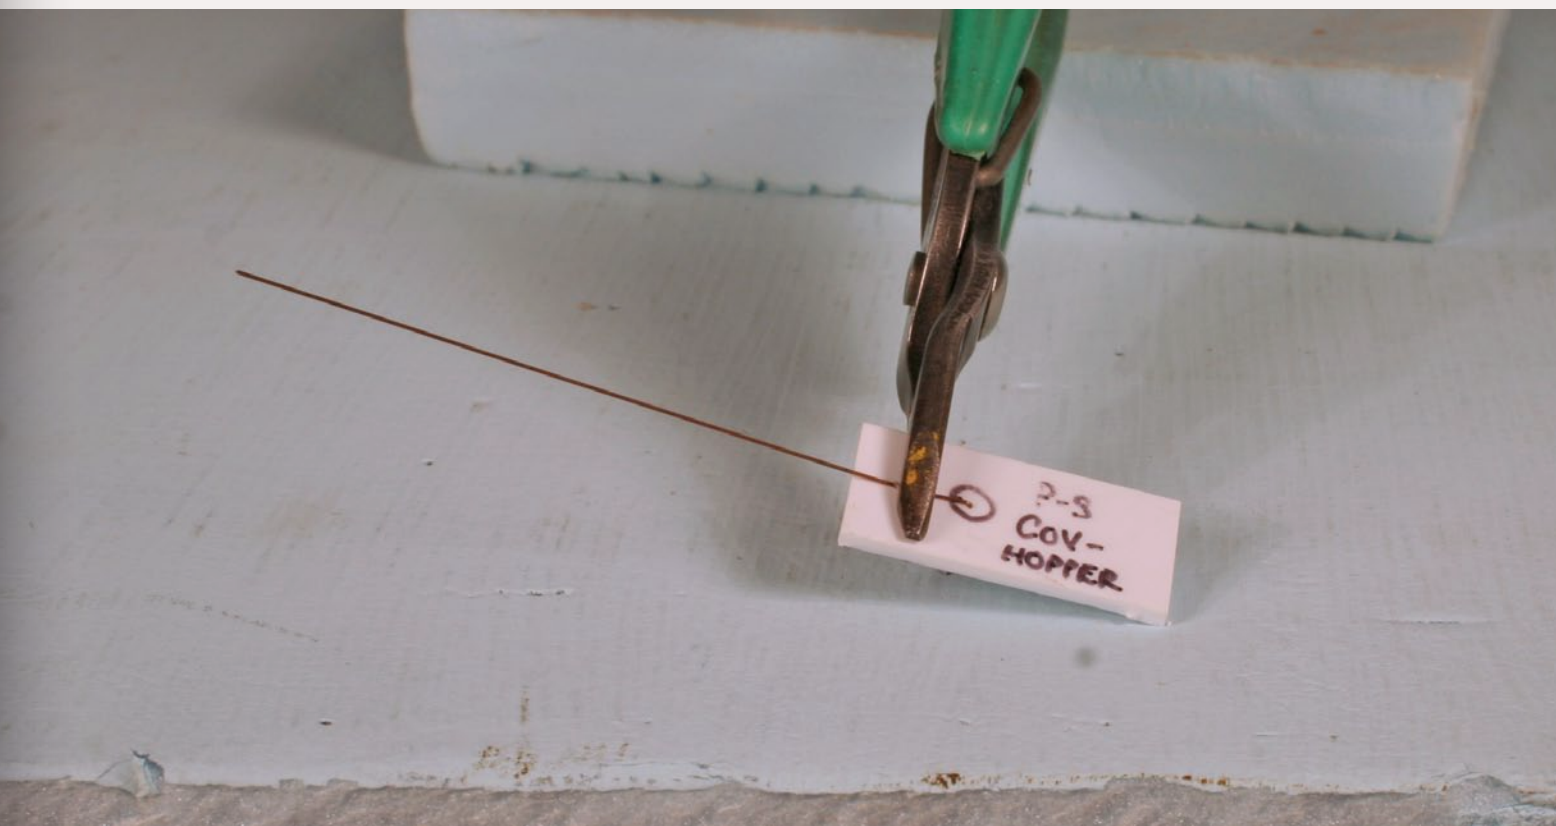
No less than 38 grab irons and handles must be formed to accurately detail this car. A simple grab iron bending jig can be made from a piece of sheet styrene with a hole drilled inboard the width of the grab irons to be bent as shown.
